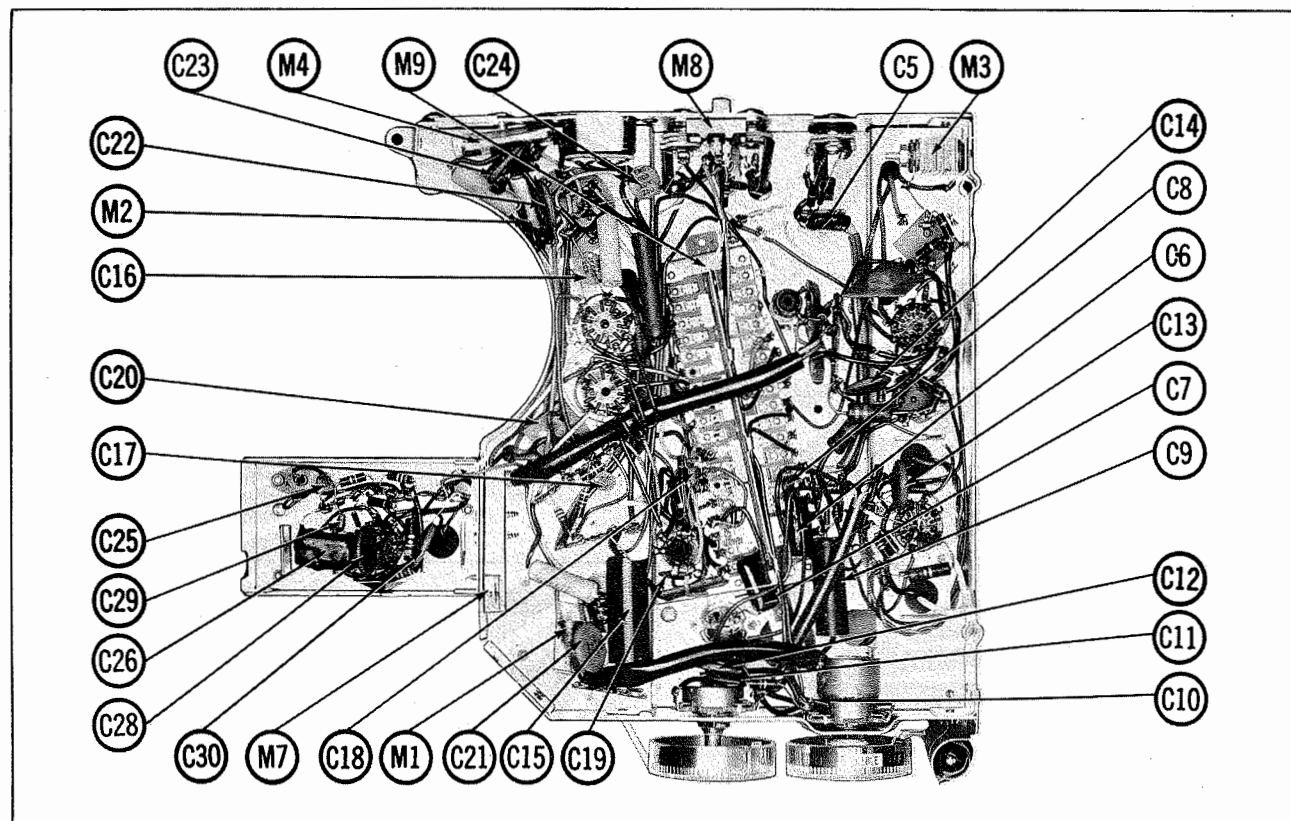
Bottom View of Amplifier Chassis- Capacitor and Miscellaneous Identification.
